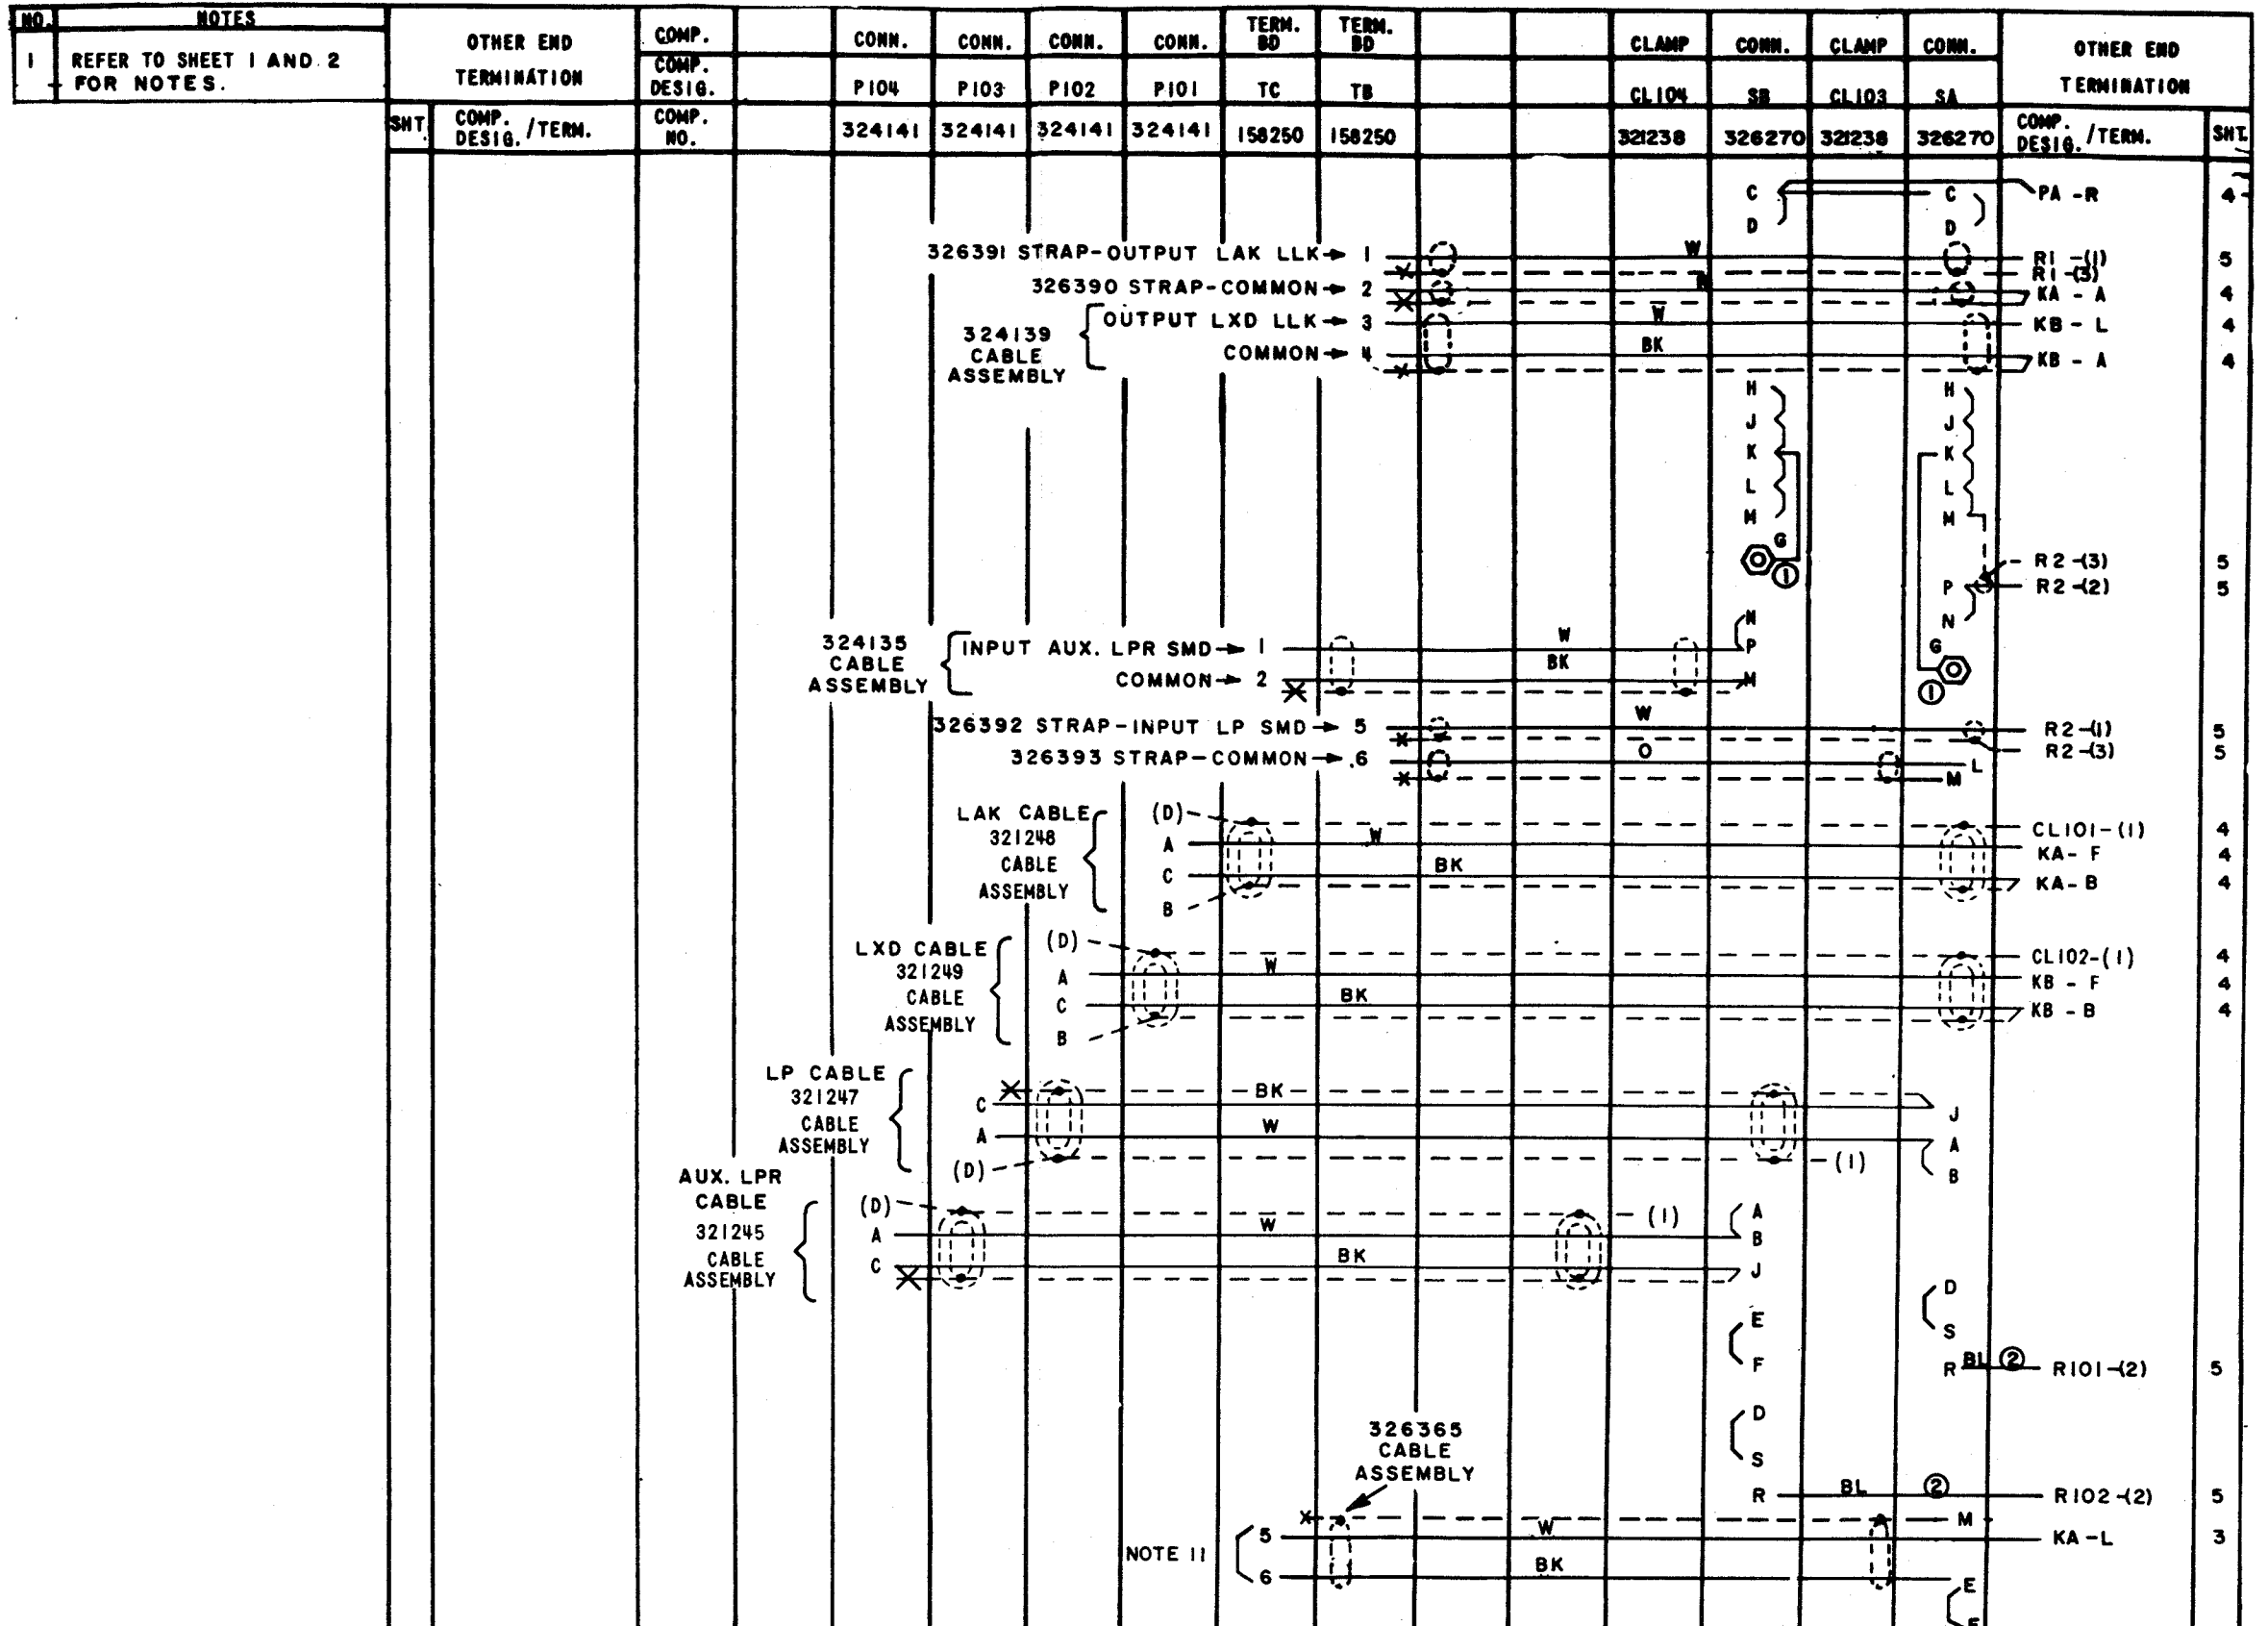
323811 Electrical Service Assembly (Signal) Wiring Diagram (Sheet 3 of 5)
